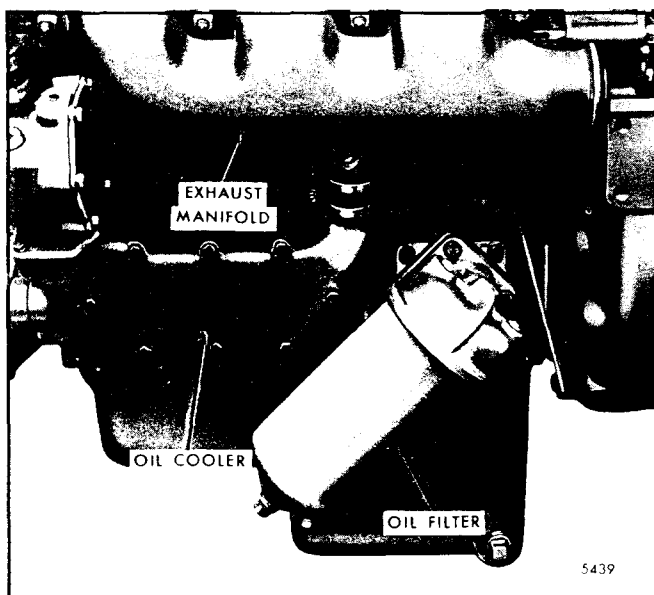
Typical Full-Flow Oil Filter Mounting
